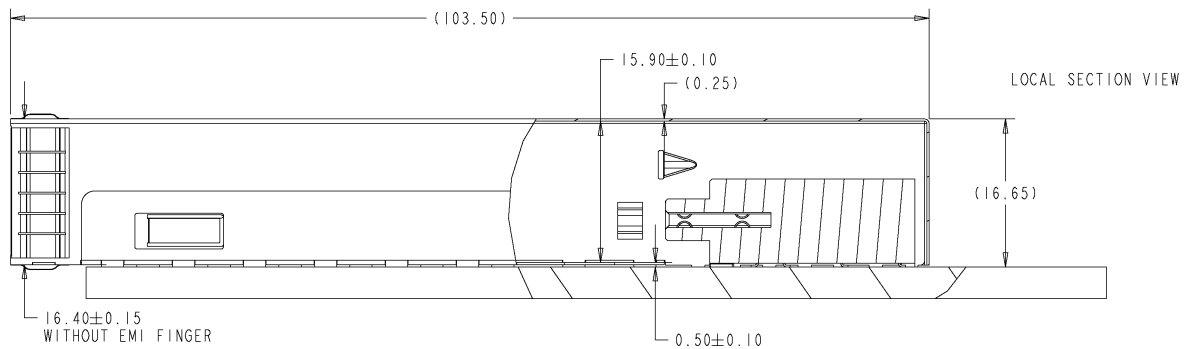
Side view of a 1x1 cage with vertical cage dimensions
